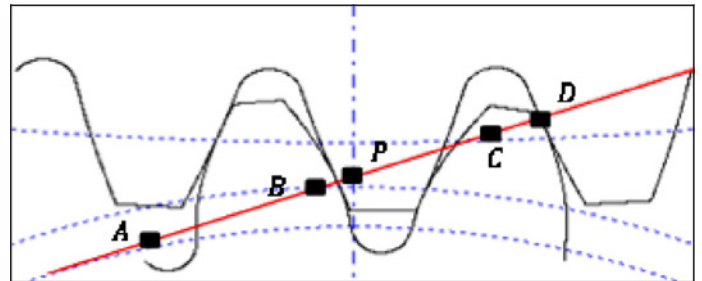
The path of contact between two tooth flanks of the wheel and the pinion.
